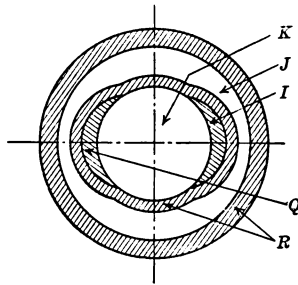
SECTION OF FISCHER VALVE AND CYLINDER
